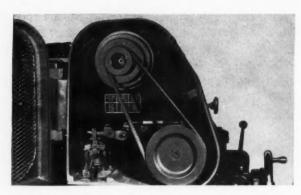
Method by which brake in the drive of grinder is actuated by a powerful, compact solenoid
